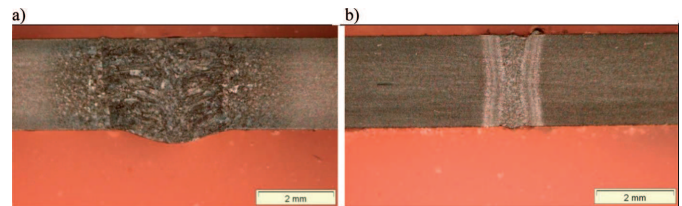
Macrostructure of the butt joints produced by: a) HPDDL at 660 J/mm ($t_{8/5} = 22$ s), b) Disk laser at 38 J/mm ($t_{8/5} = 0.16$ s)
